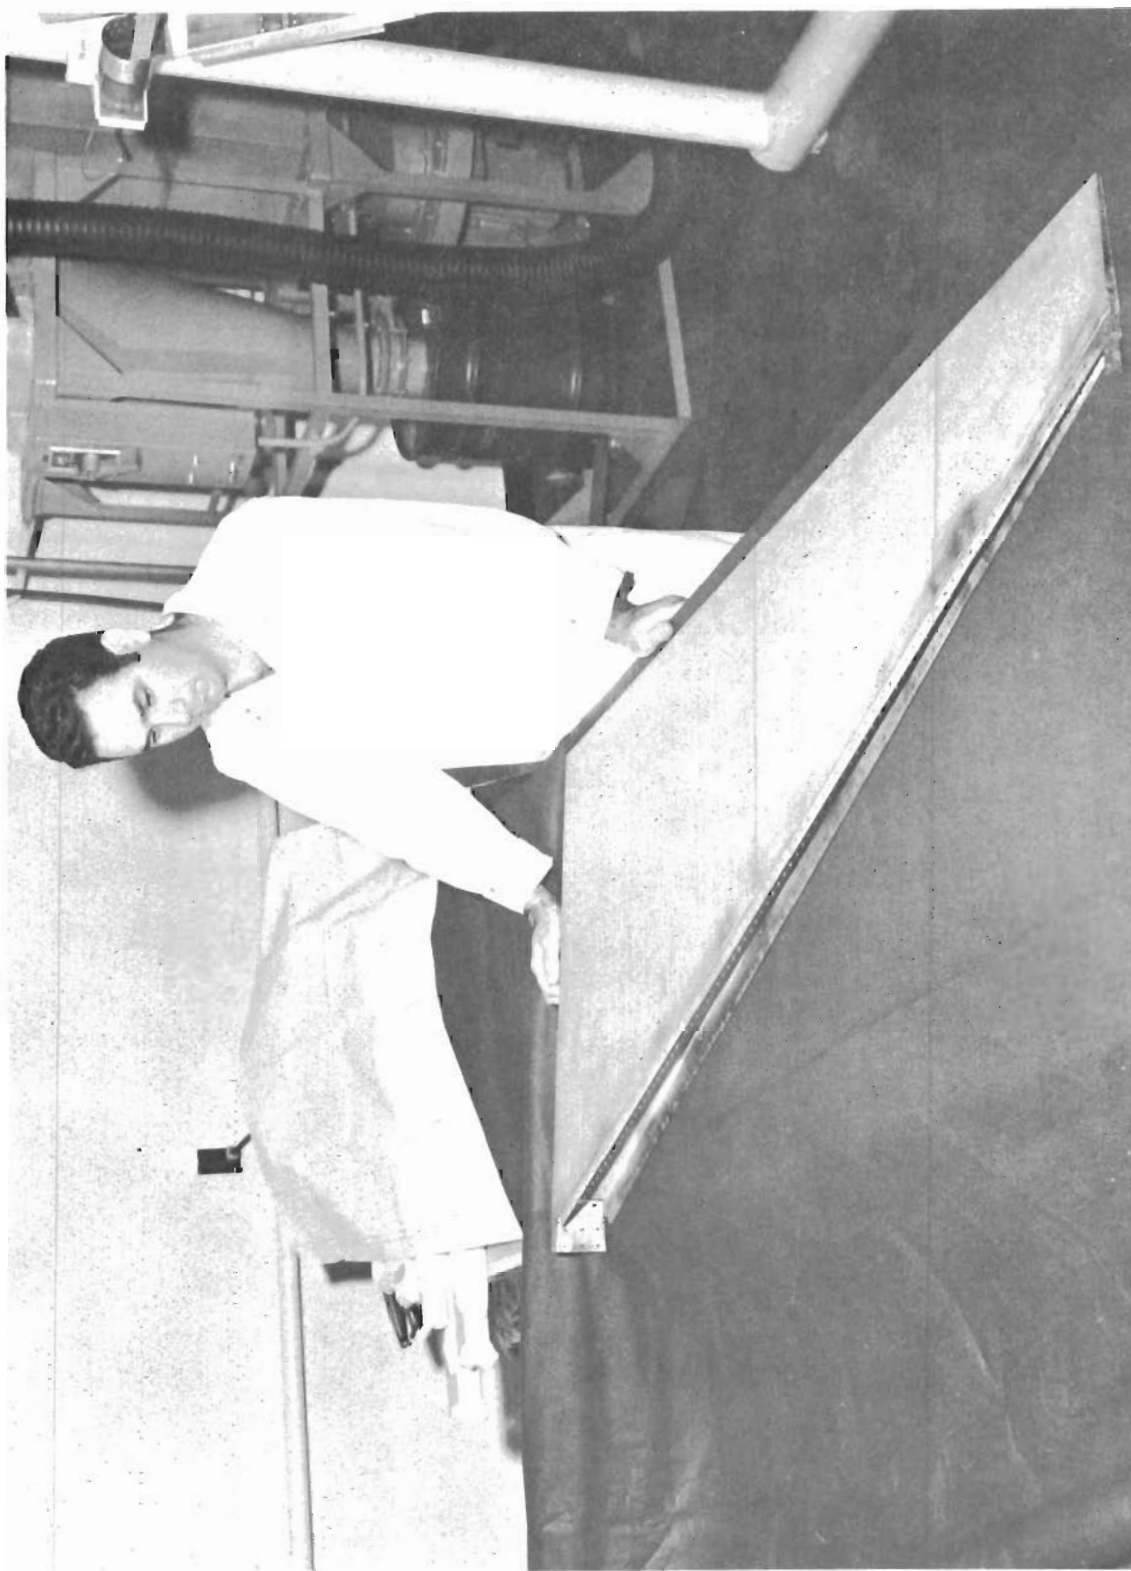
Beryllium Rudder Bonded Trailing Edge Assembly
